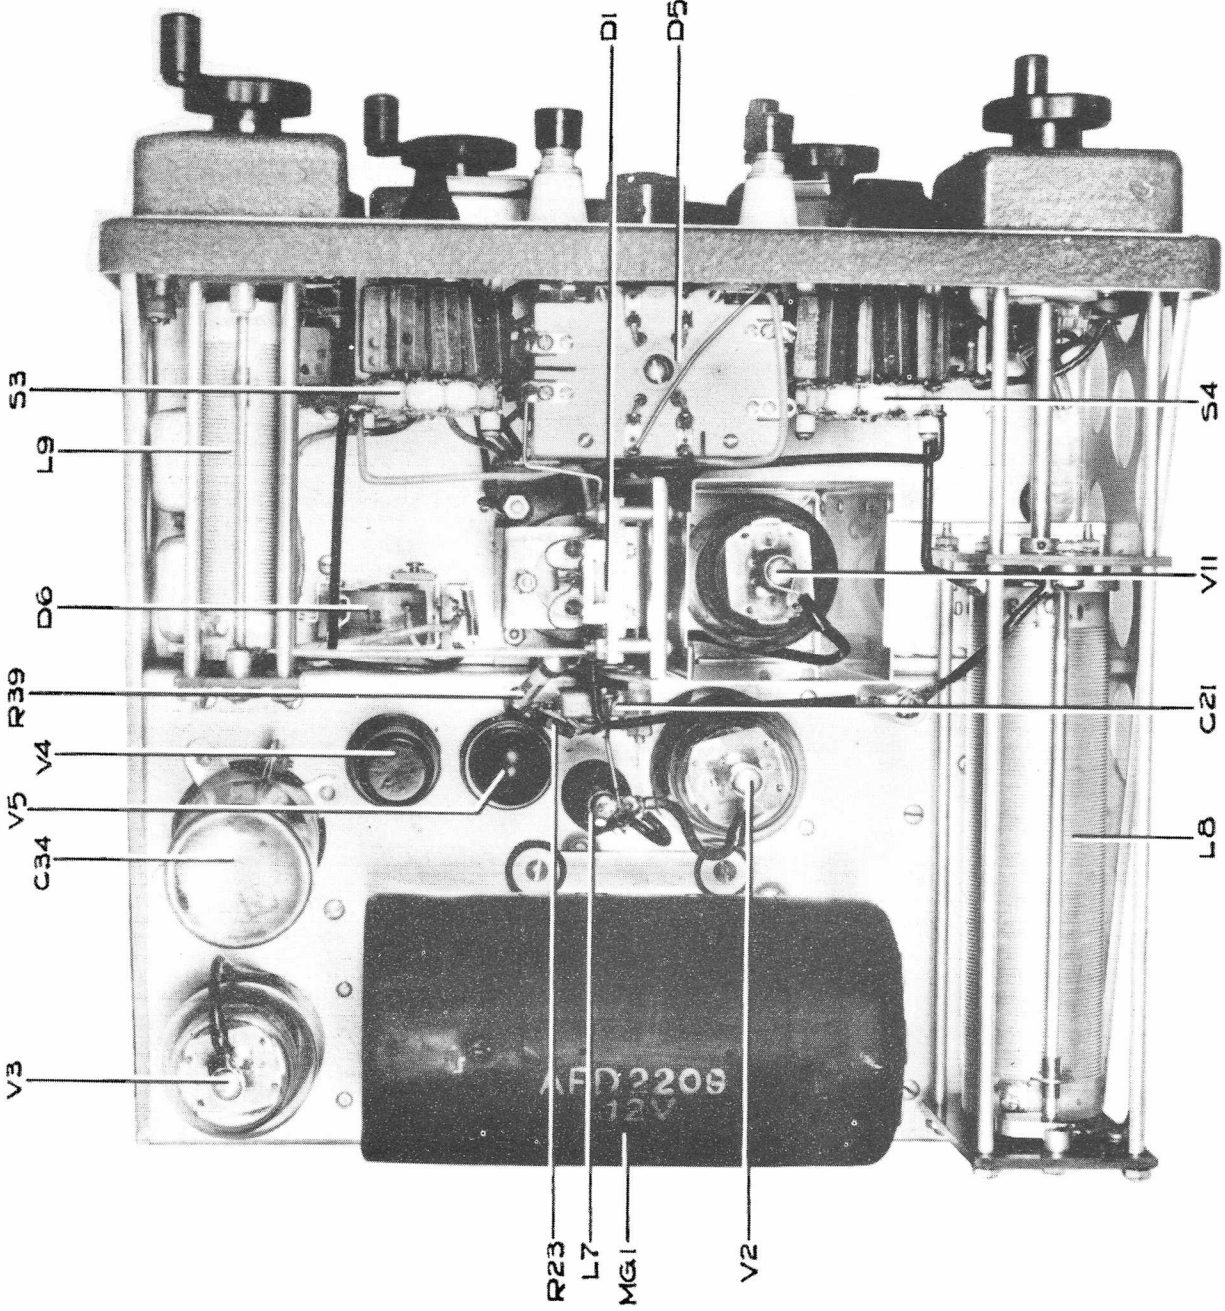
GENERAL PURPOSE TRANSMITTER CHASSIS ASS'Y. TOP VIEW
